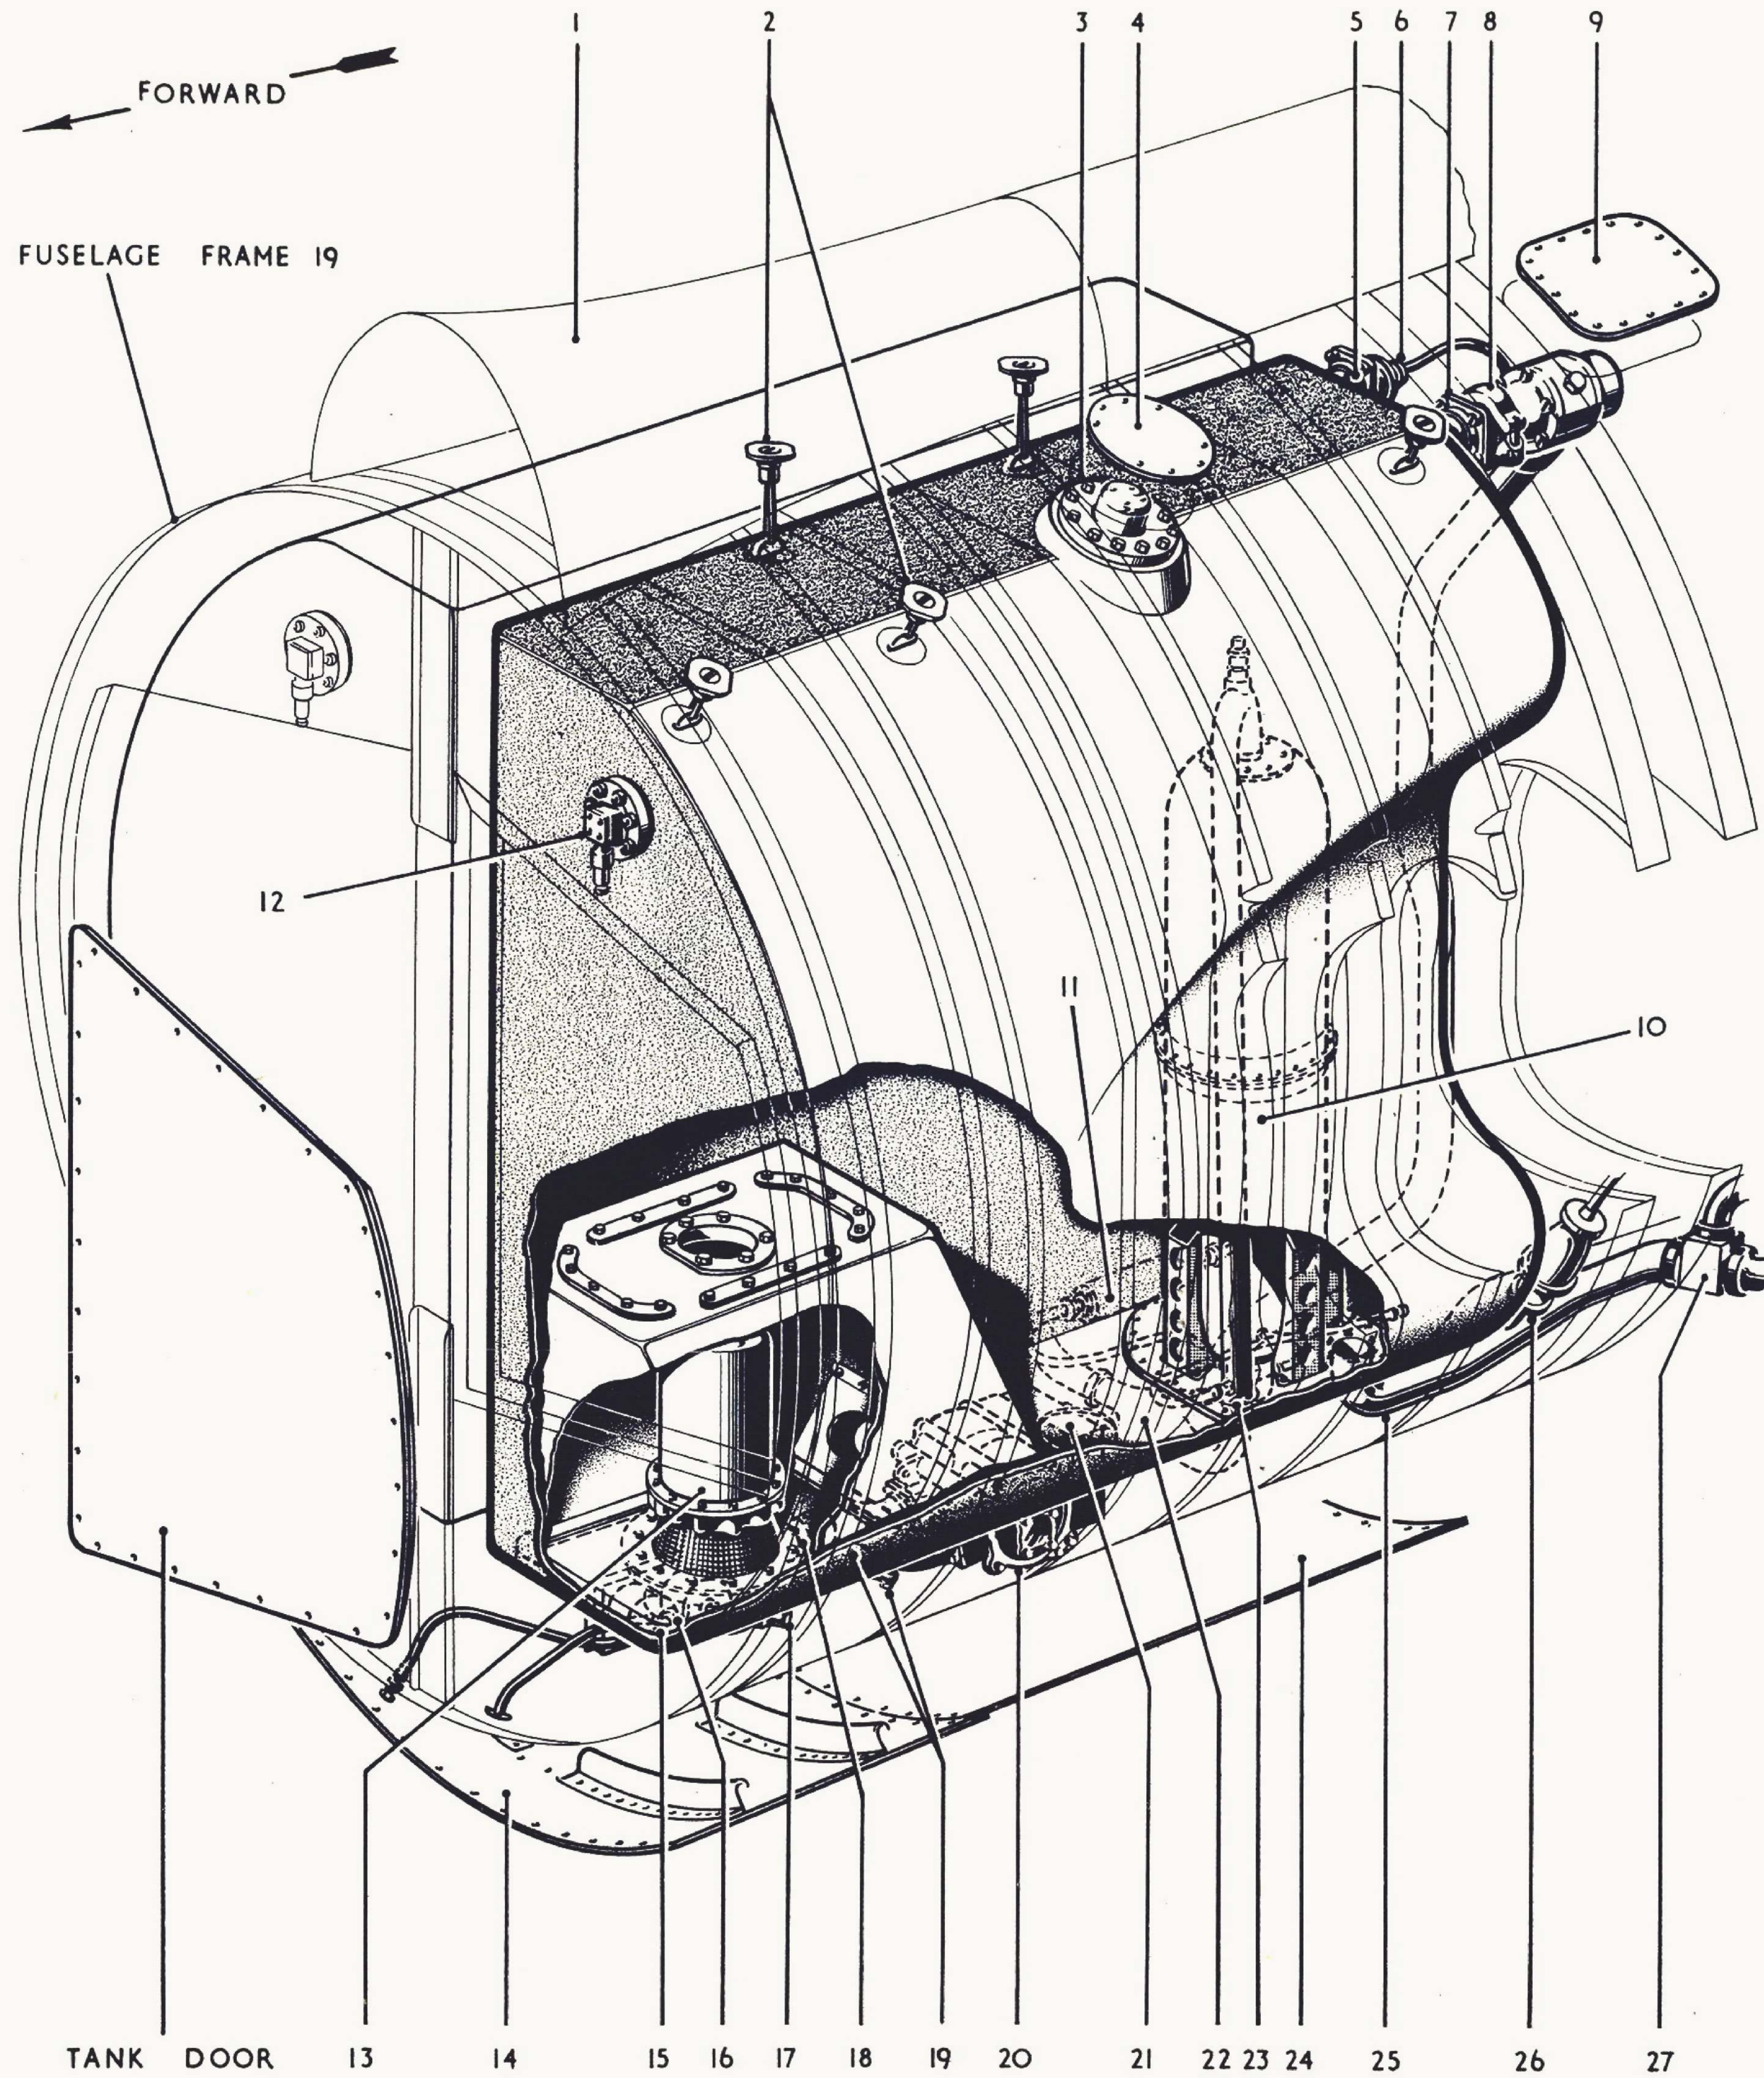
REMOVAL OF FRONT FUEL TANKS
